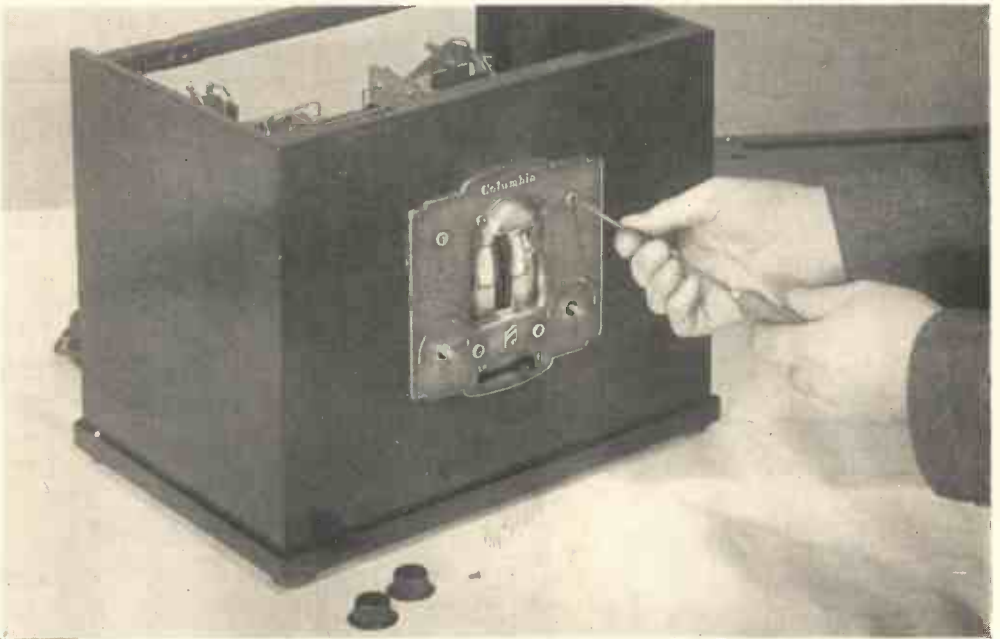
HERE WE SEE THE CONTROL KNOBS AND ESCUTCHEON BEING REMOVED.
